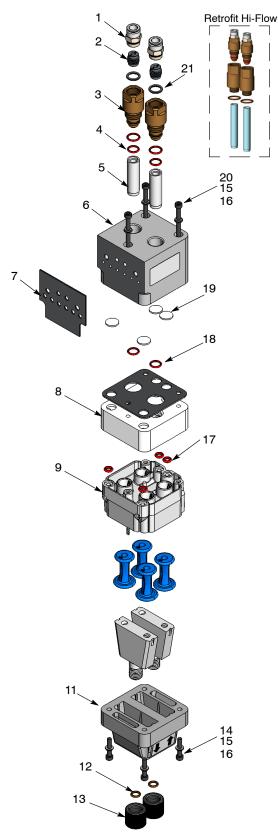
Disassembled Pump (All parts shown exploded for reference)
